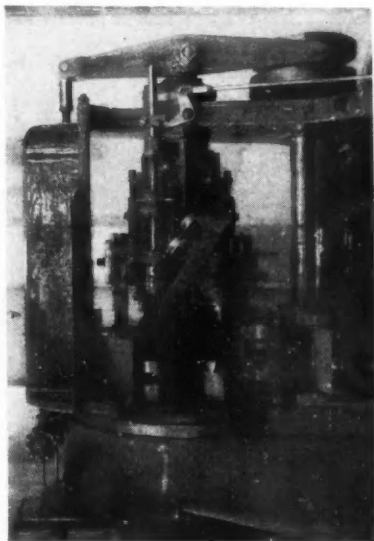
Baird six-spindle horizontal chucking machine set up on a Chrysler fan pulley, which is finished in one operation
